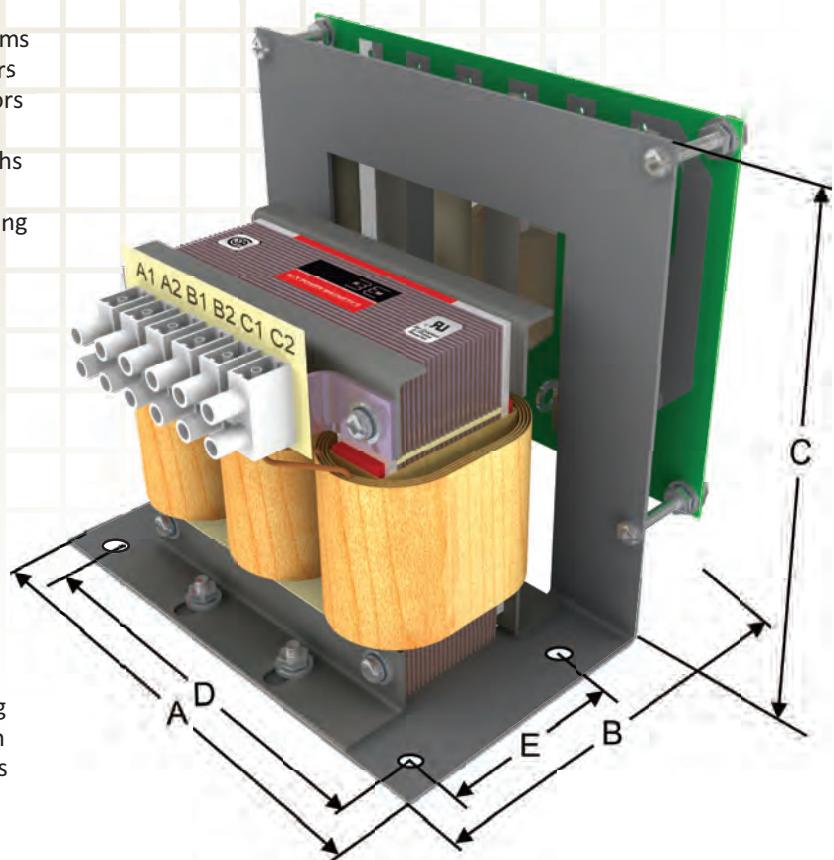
Dimensioned view of a Rex Motor Guarding Filter
